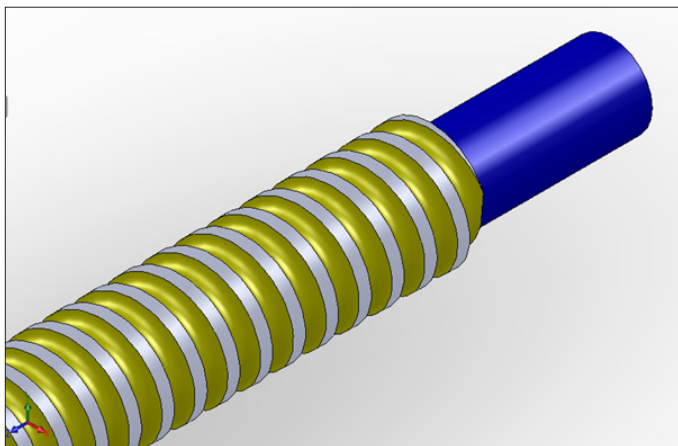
Partial isometric view of a linear slider rail which will be improved (the red surface is the endpoint, blue surface is for fixing and purple surface the location of ball bearings).
